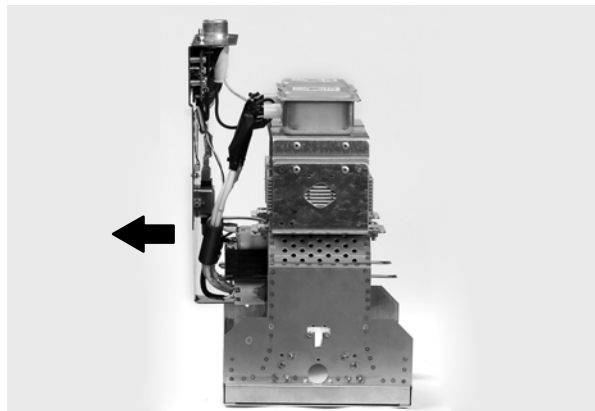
Removing the Transformer Bracket (External Blower Version Shown)
